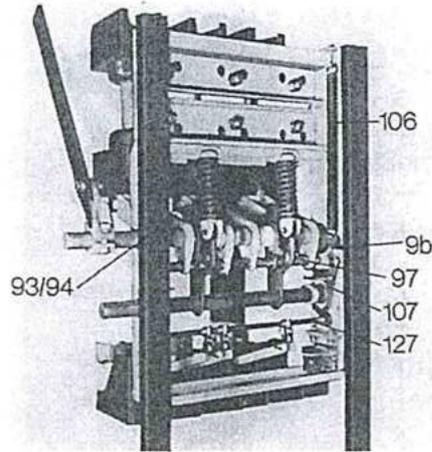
A: Switch in ON-position, closing springs discharged, opening springs charged, trip mechanism latched ready for tripping.
